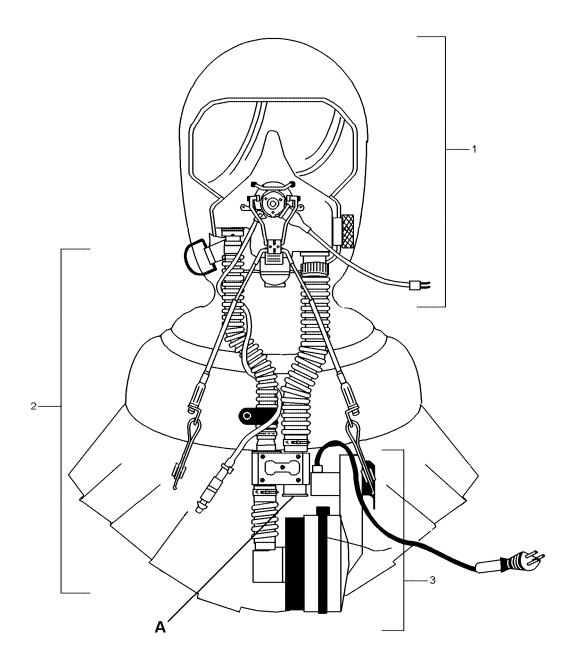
A/P22P-14(V) Series Respirator Assemblies (Major Components Identified) (Sheet 1 of 2)
